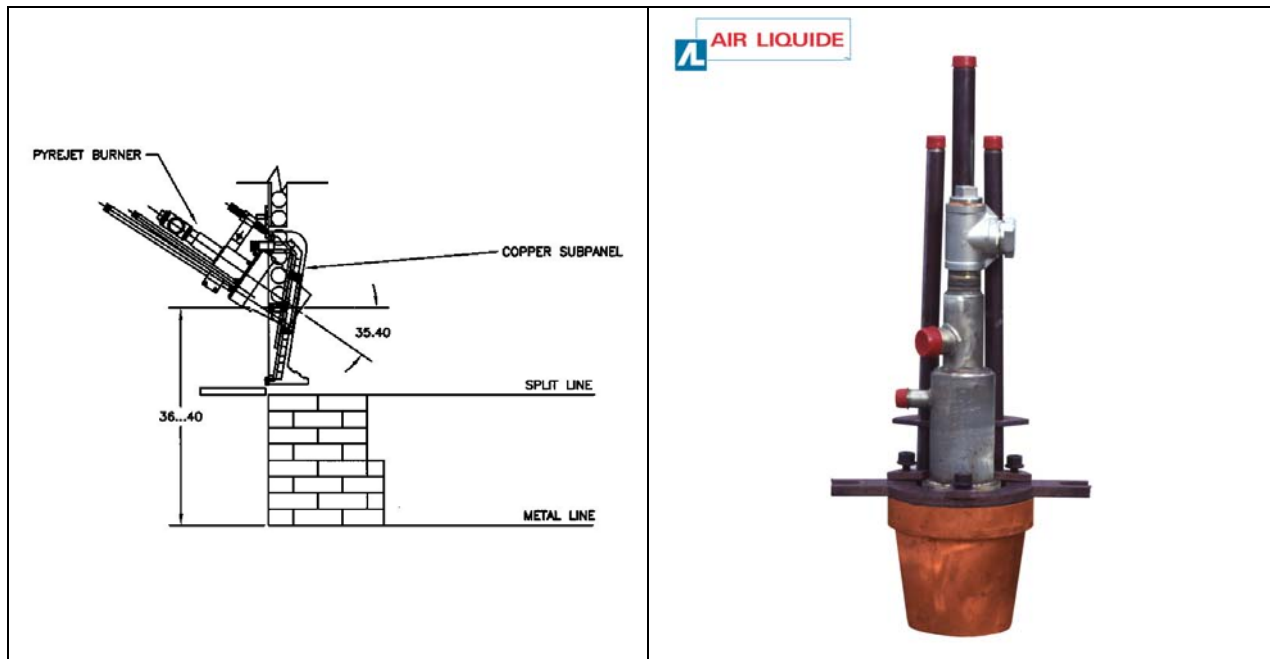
Typical PYREJET™ installation (left) and assembly (right)
